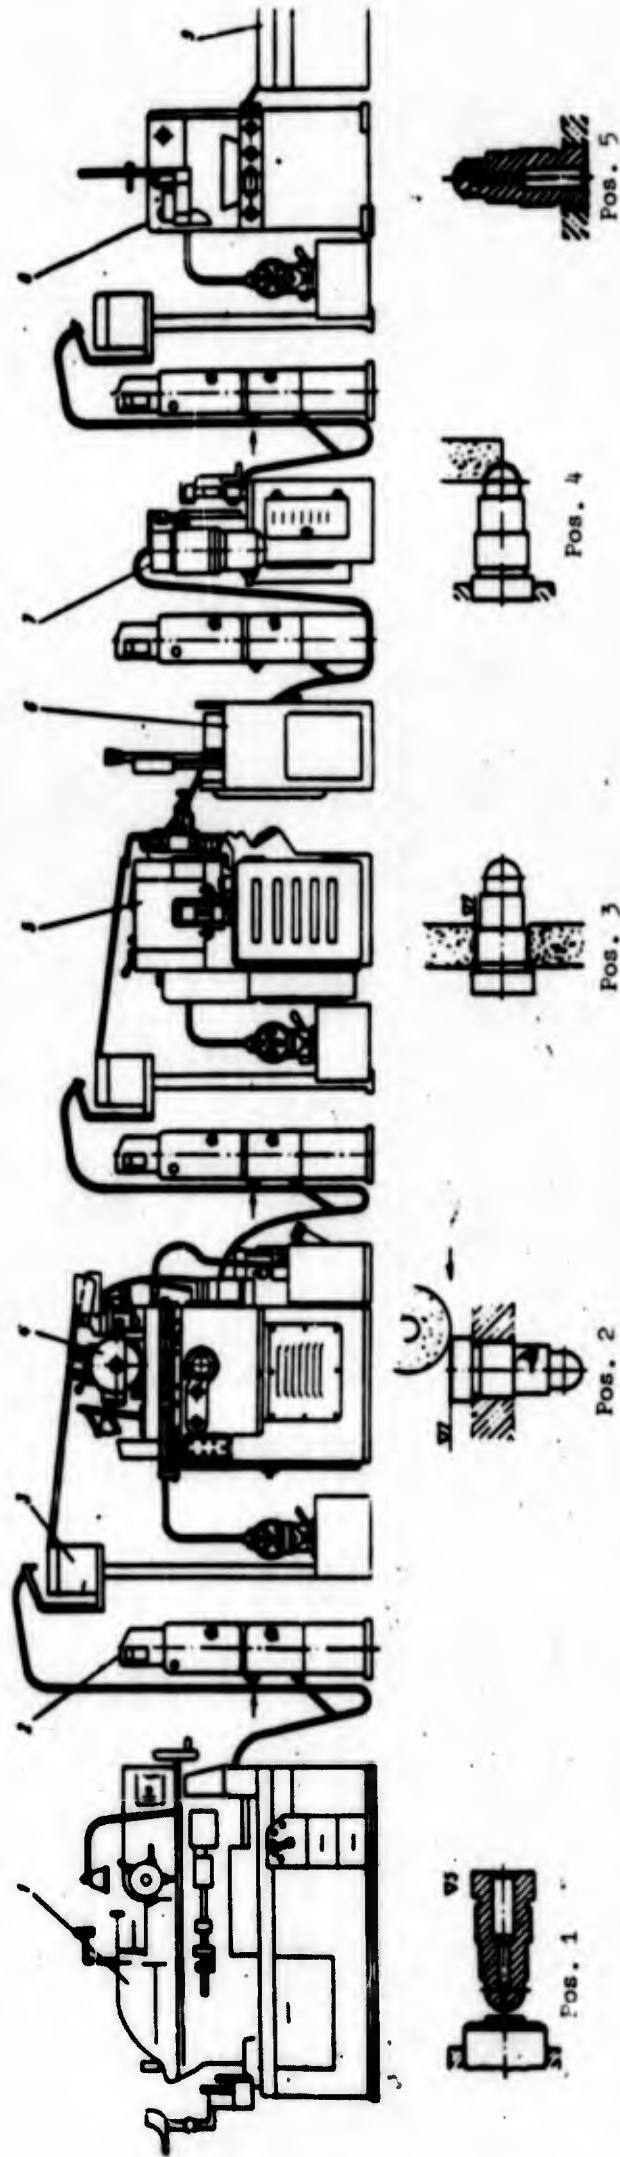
Diagram of transfer machine for working spray injectors. 1) automatic turret lathe 11712; 2) pneumatic conveyor; 3) vibration hopper; 4) automatic end-grinder on SKB-3; 5) centerless grinding machine 3G132; 6) subsetter; 7) automatic sphere-grinder; 8) semiautomatic electric spark machine EP-5M for edging holes; 9) automatic checker.
